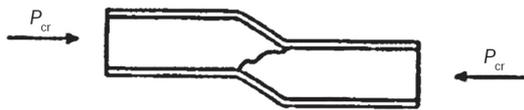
Shear crimping failure when the core is solid (not a honeycomb core)
